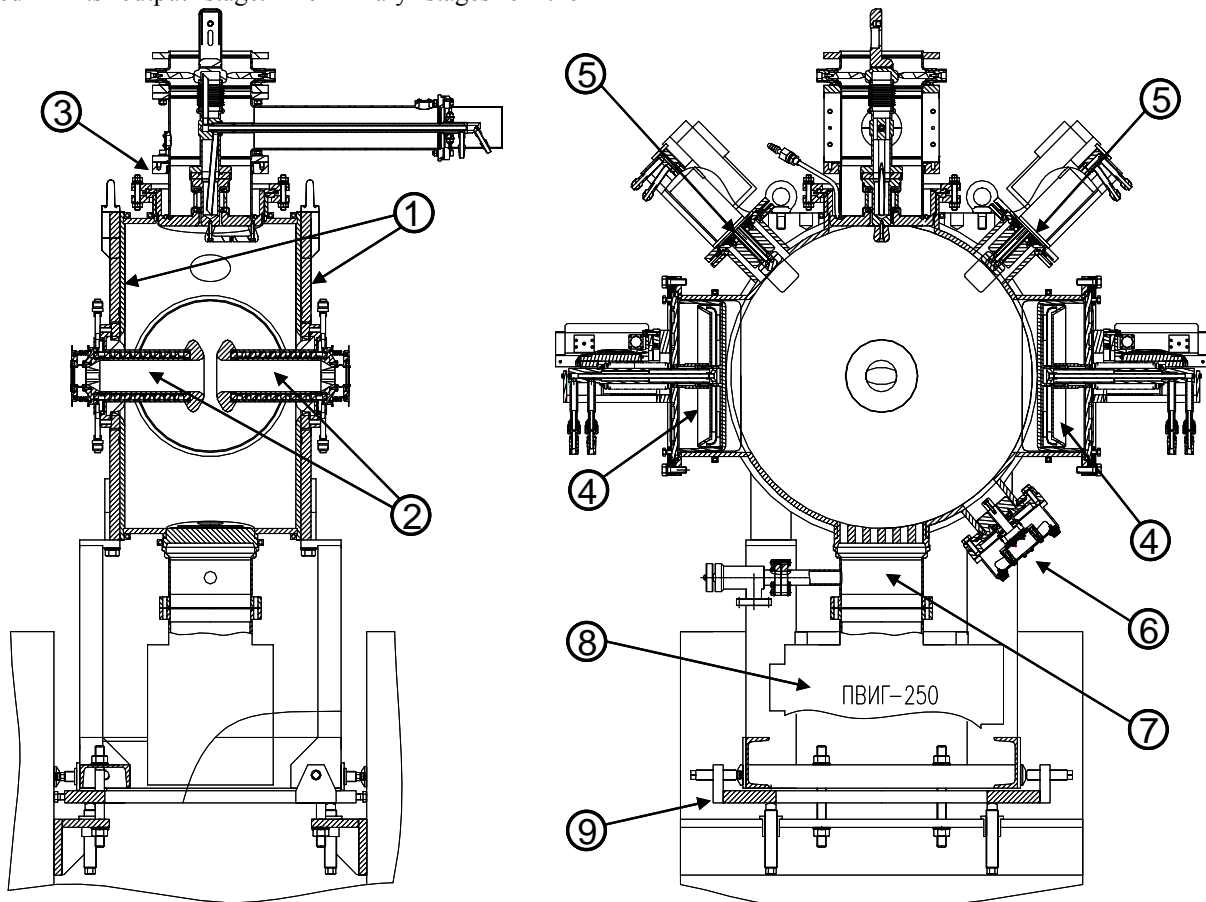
BEP cavity design: 1 - bimetallic walls; 2 - coaxial inserts; 3 - cavity input coupler; 4 - main cavity tuners; 5 - cavity HOM tuners; 6 - sampling loop; 7 - vacuum pumping port; 8 - vacuum pump; 9 - cavity stand
